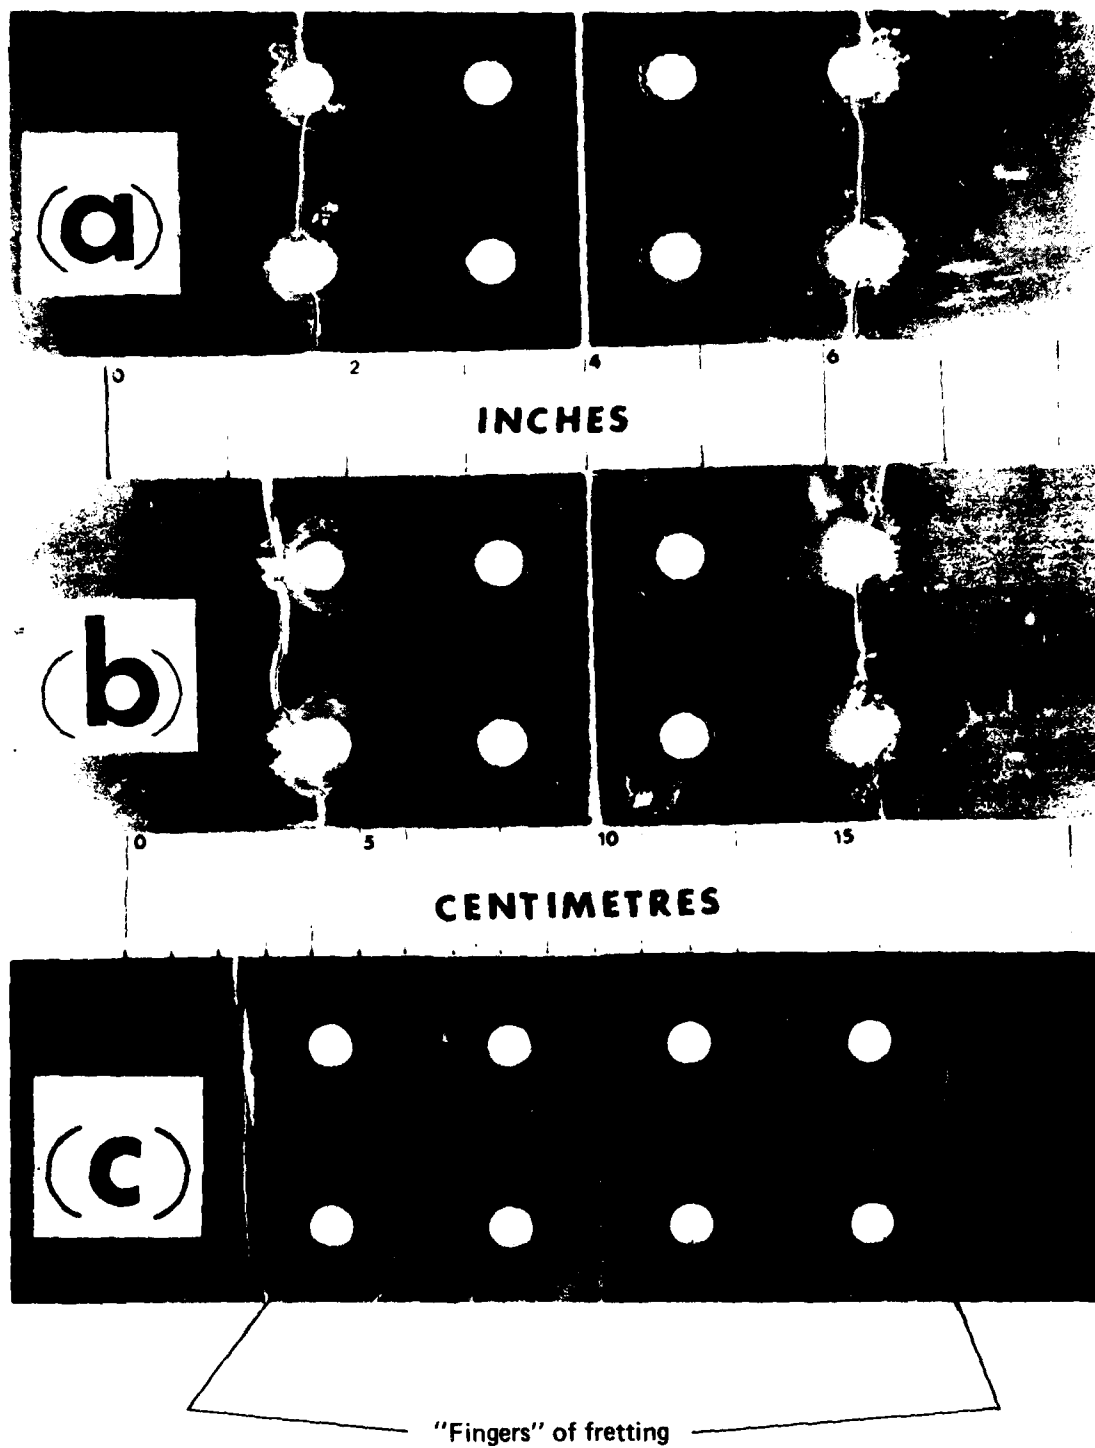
4-PIECE TIGHT DRY SPECIMEN FRACTURES
